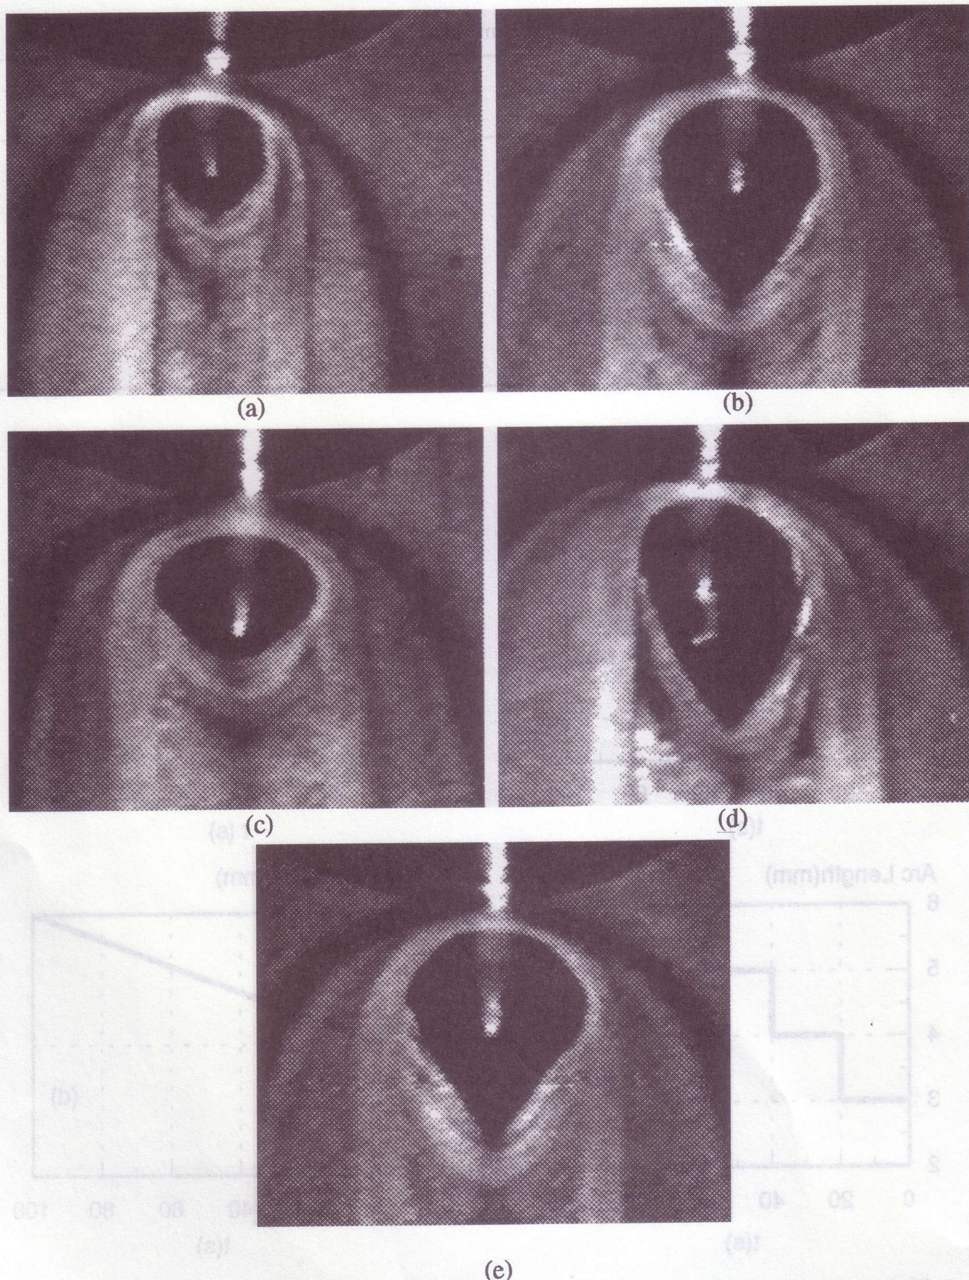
Typical weld pools: (a) small pool; (b) large pool; (c) wide pool; (d) long pool; (e) sharp pool.
